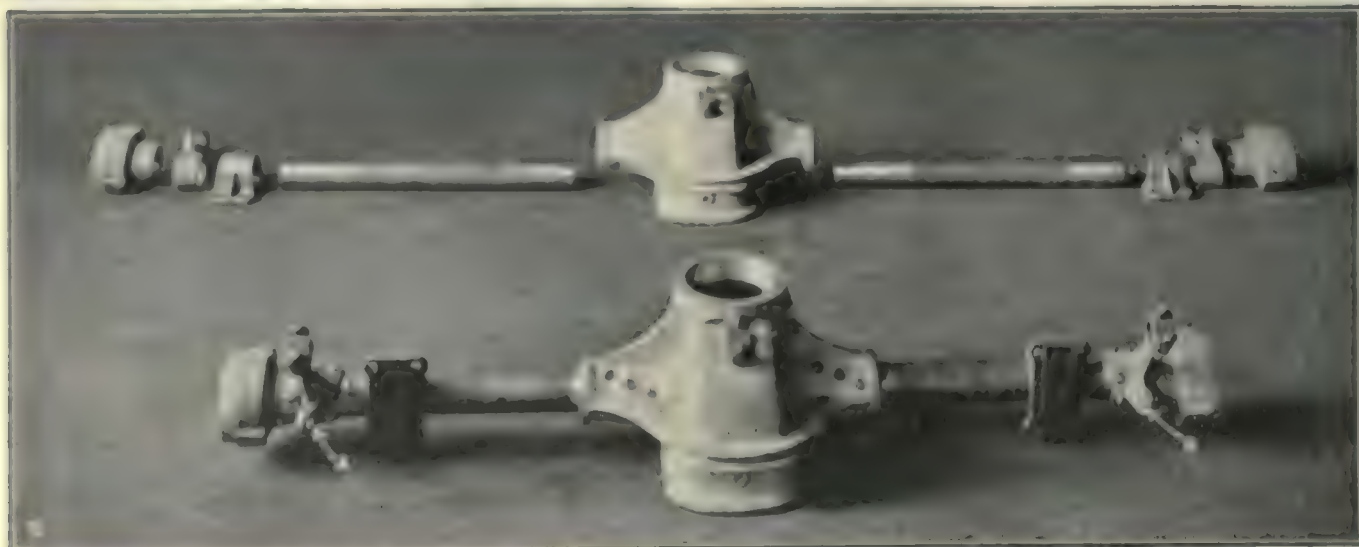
FORCING REAR AXLE HOUSING PARTS TOGETHER. FIG. 5—REAR AXLE PARTS AND AN ASSEMBLED AXLE.
